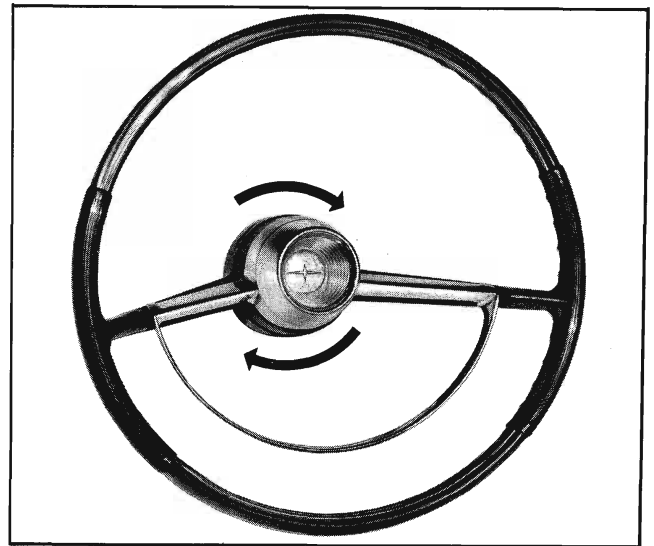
Removing Deluxe Steering Wheel Horn Button
